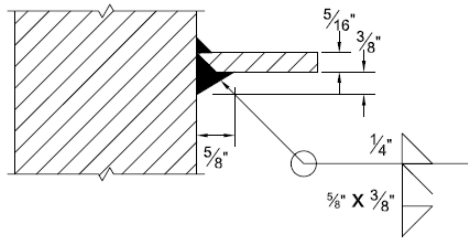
Weld details for 33-3-12-TXEC-SG-SA, as called out in Figure 5-14
